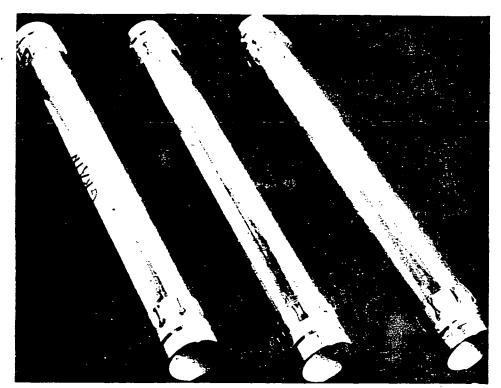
Peeled and Unpeeled Resistance Welded Liners, 5 cm (2 in.) Diameter
